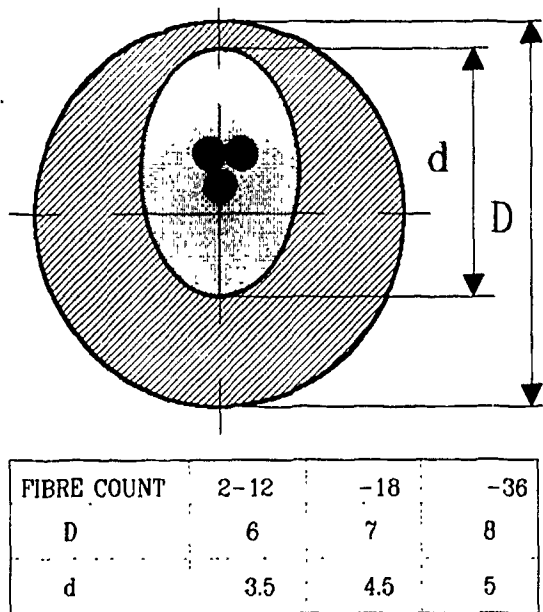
CORE ELEMENT DIMENSIONS (in mm)
